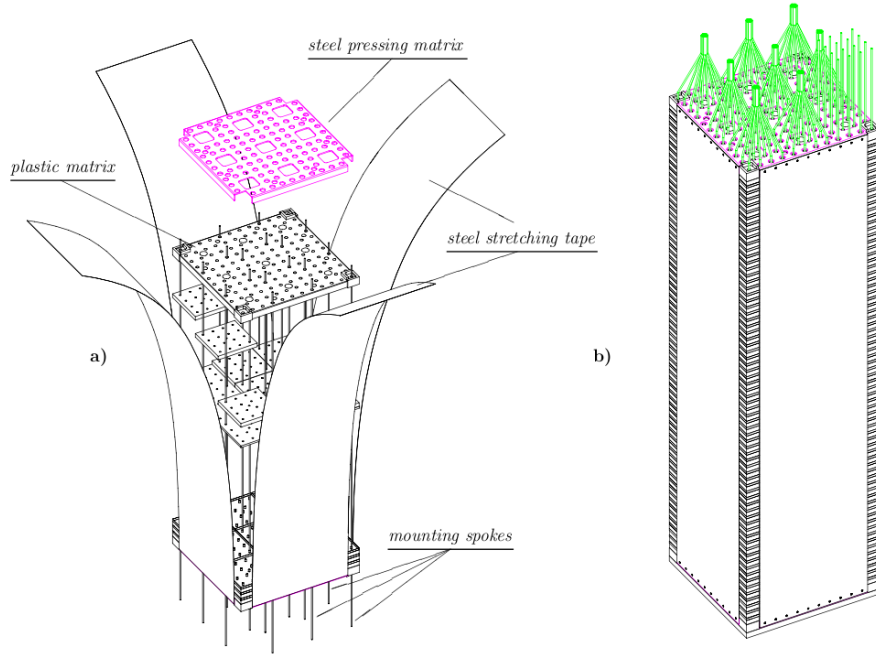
(left) Exploded view of one ECAL module. (right) The assembled stack, with the inserted fibres.
